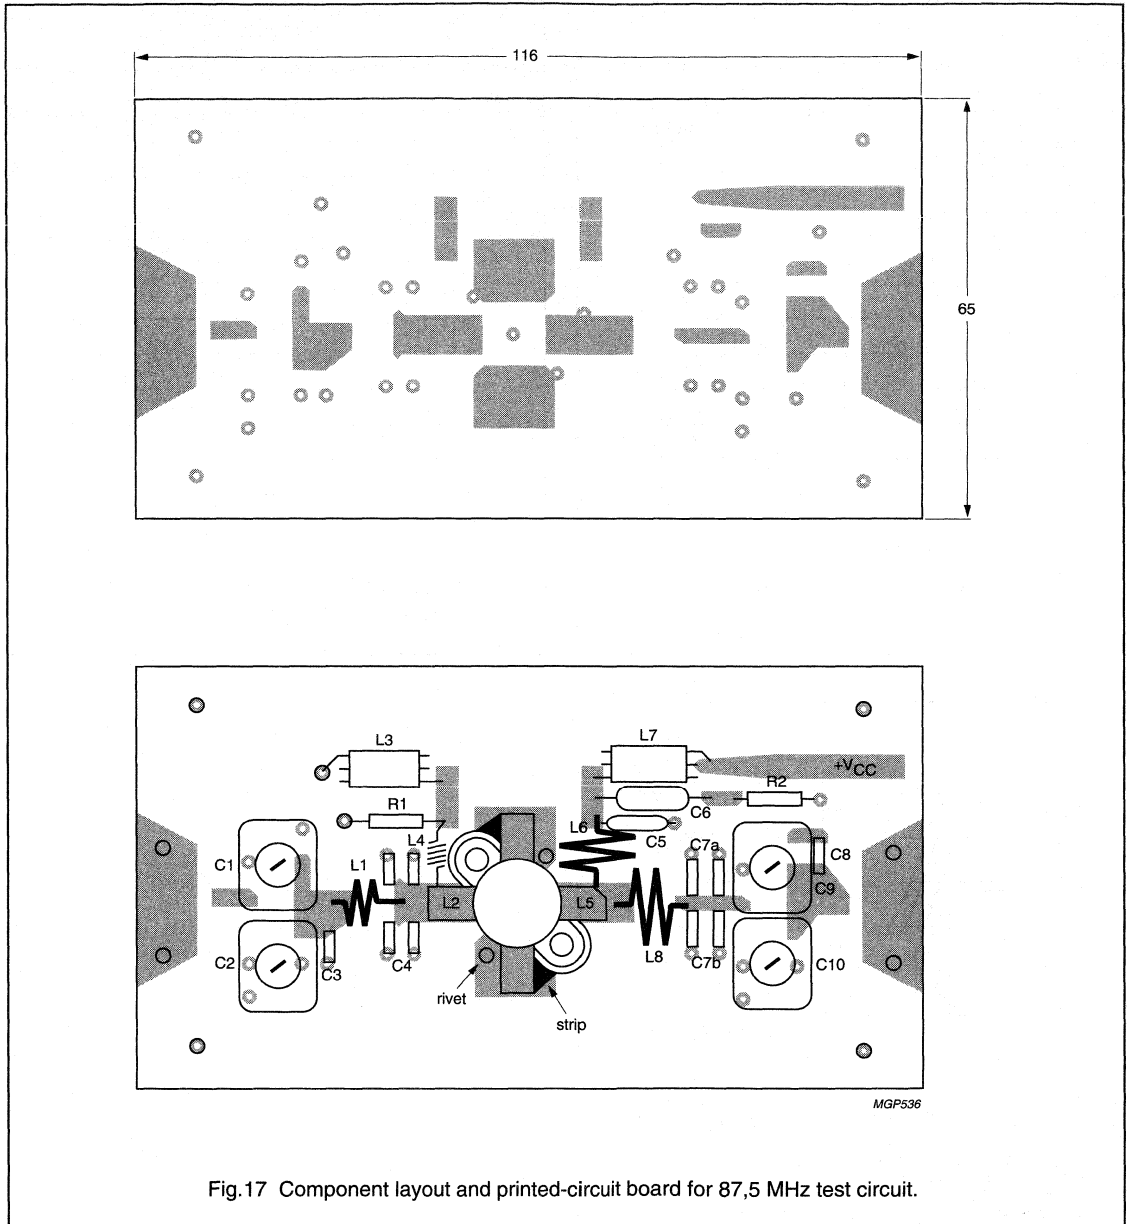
Component layout and printed-circuit board for 87,5 MHz test circuit.
